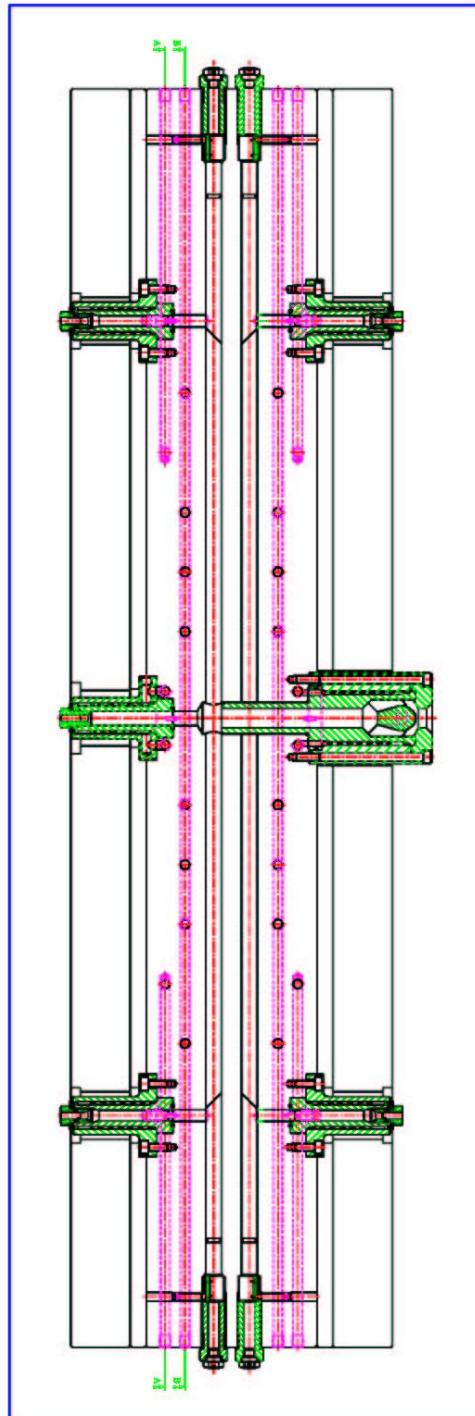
TOPOGRAPHICAL DRAWING OF THE COMPONENTS' POSITION
